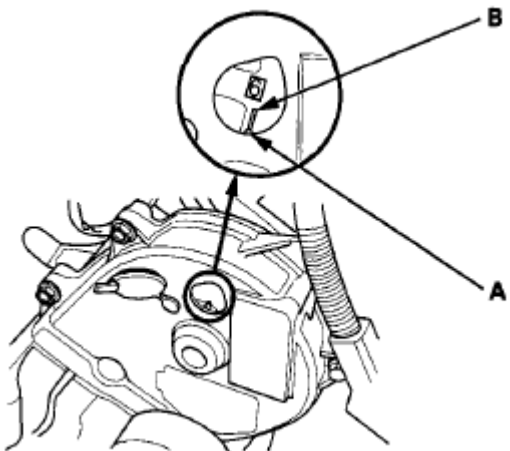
Aligning Pointer On Front Upper Cover With No. 6 Piston TDC Mark On Front Camshaft Pulley
